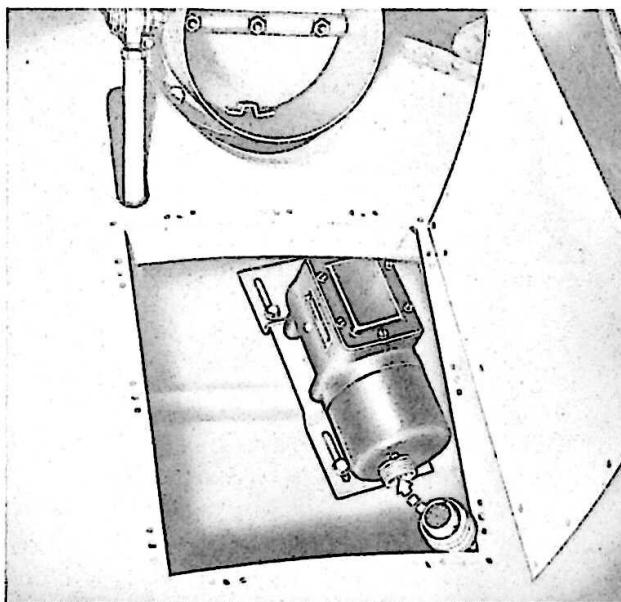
Governor Mounting, Outboard Engines of B-17 Airplanes
